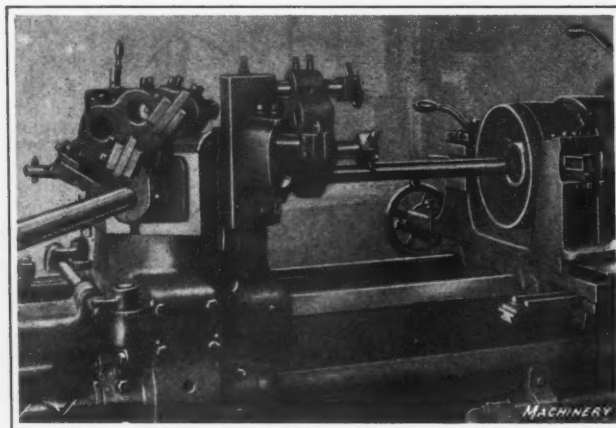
Machine engaged in finishing the Friction Pulley illustrated in Fig. 26
